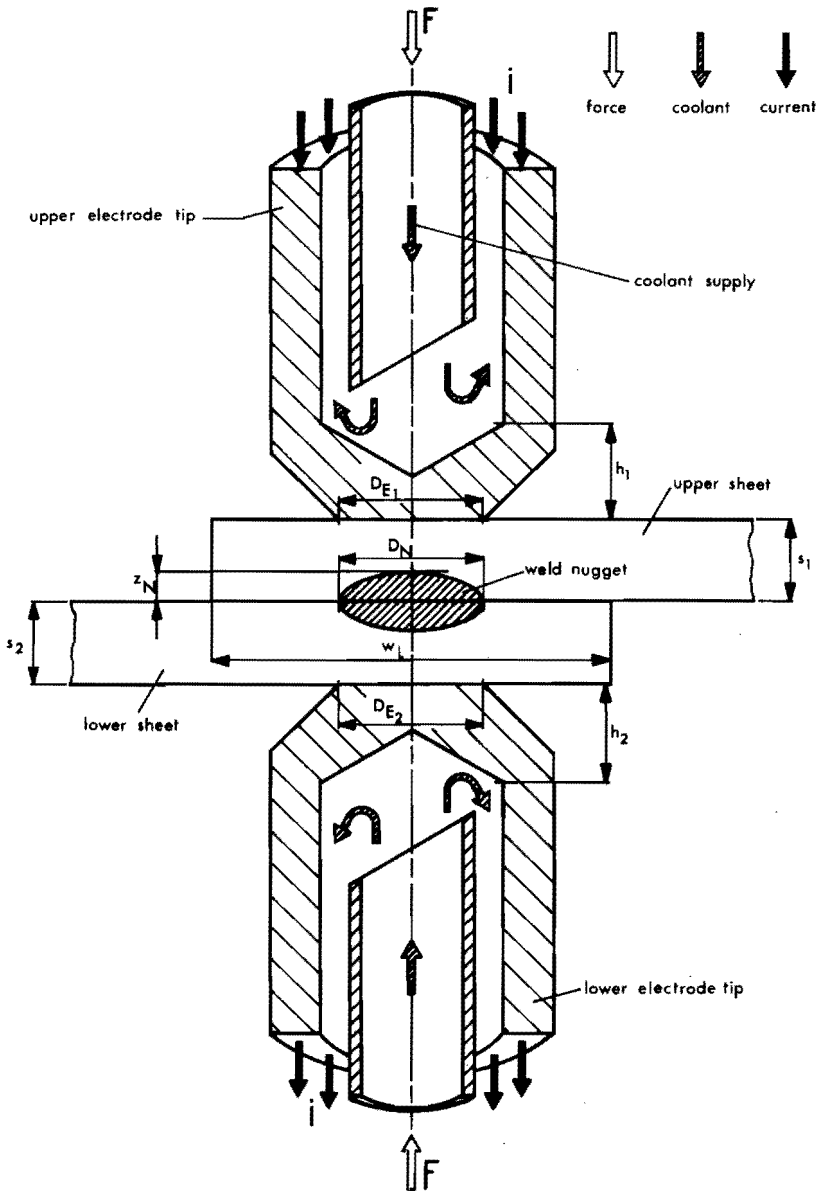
Typical Arrangement of Spot Welding Electrode Tips and Workpieces
